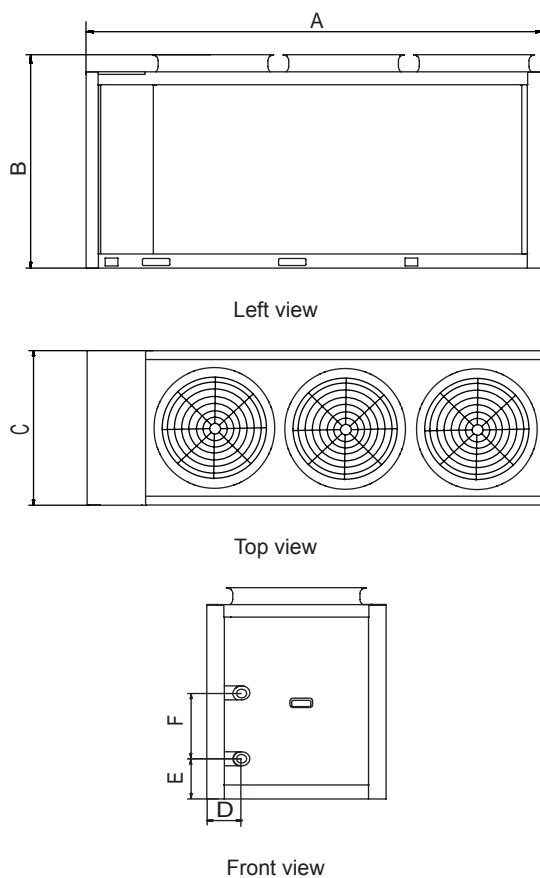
Outline dimensional of KEM-90 DNS3
